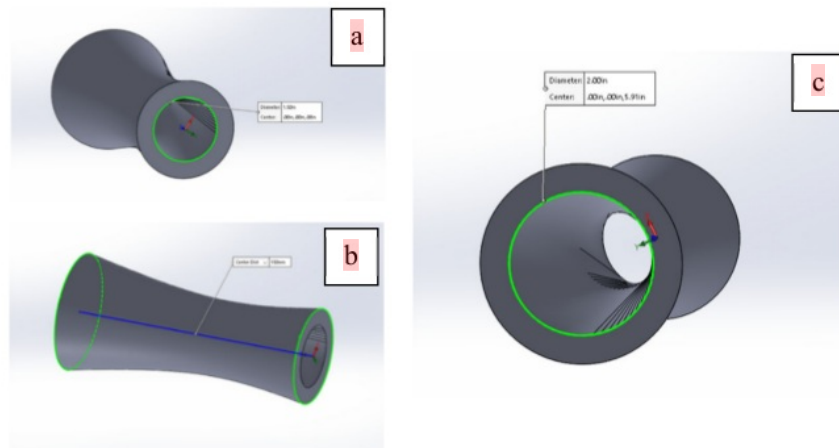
Section exhaust pipe with a diameter of 1.75 inches
